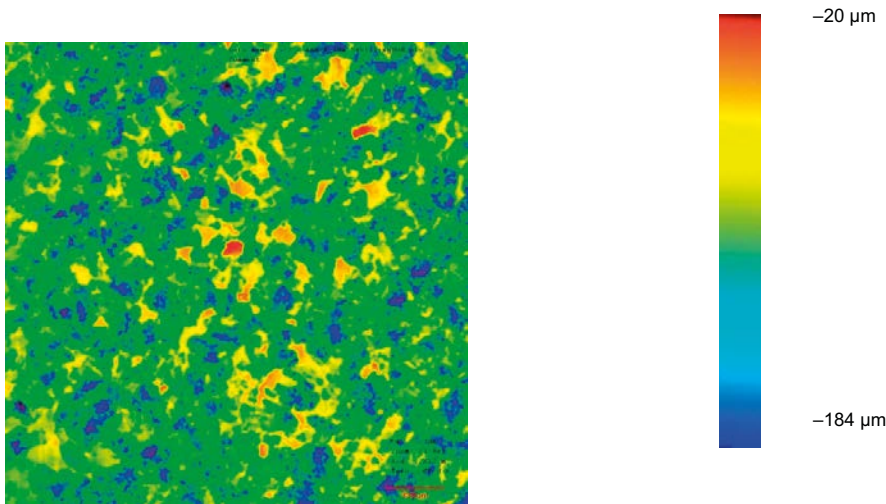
Weld (advancing) on copper material 112/2. The imaged size is 2.6×2.6 mm.
